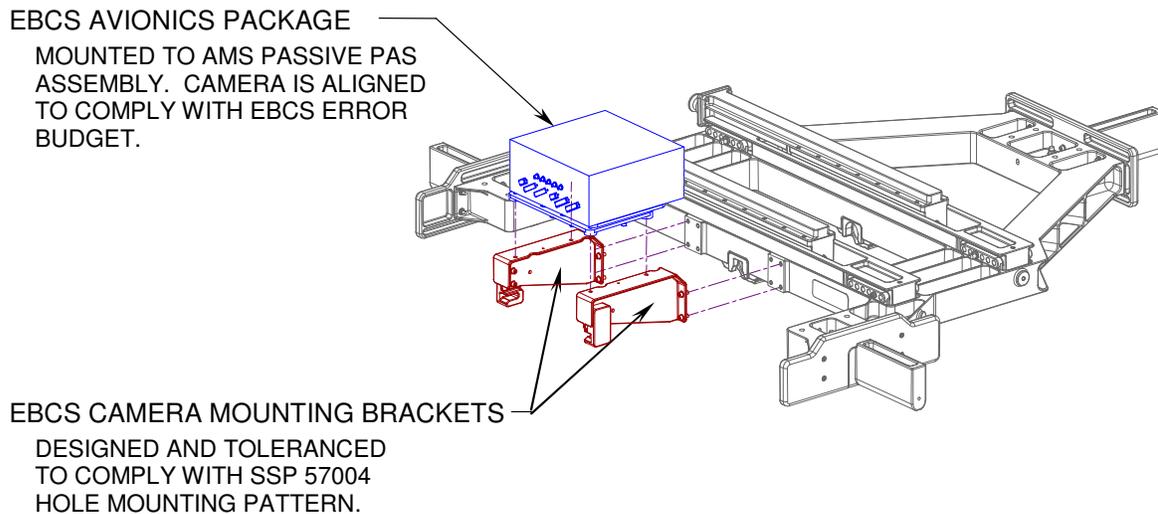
EBCS Avionics Package mounting to the PAS
